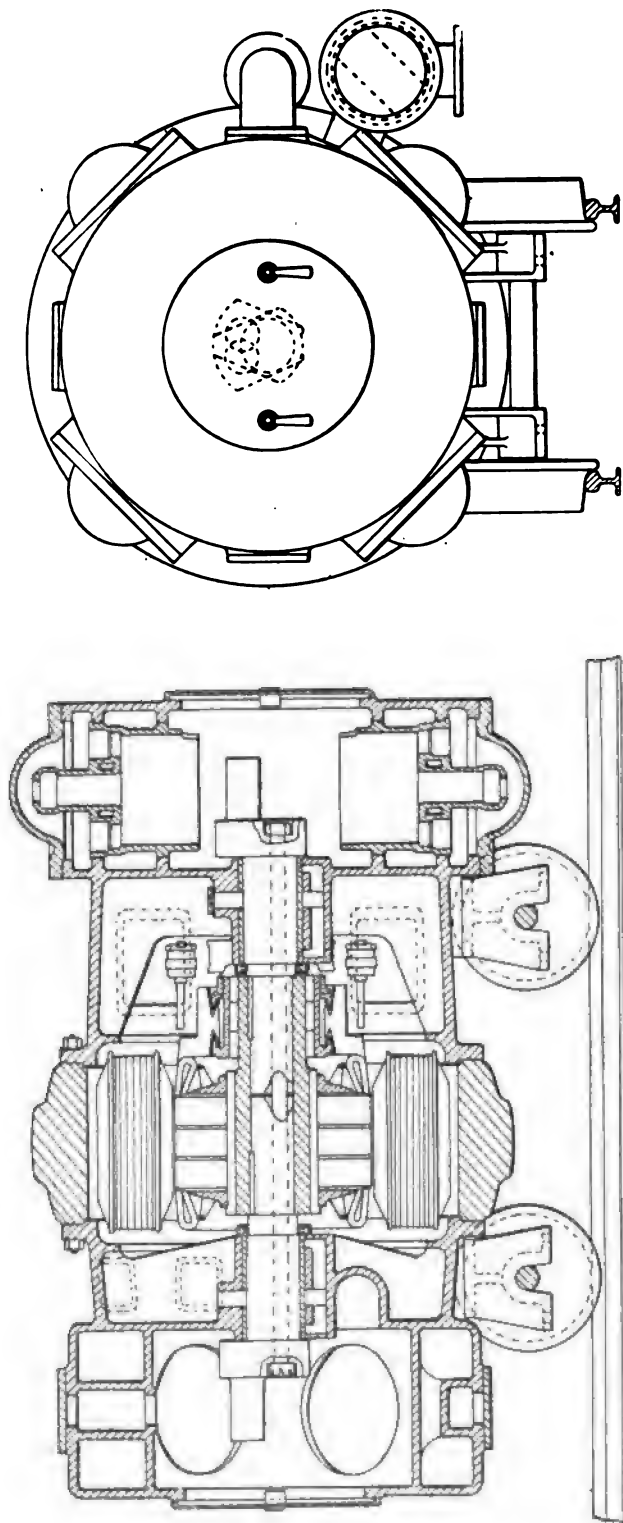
Sectional Arrangement of Direct-Coupled, Double-Ended, Electrically Driven Portable Mine Compressor
